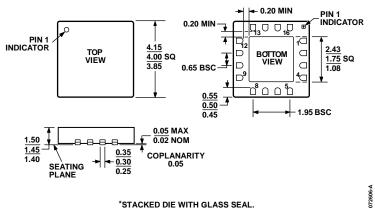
16-Lead Lead Frame Chip Scale Package [LFCSP_LQ] 4 mm × 4 mm Body, Thick Quad (CP-16-5a*) Dimensions shown in millimeters
